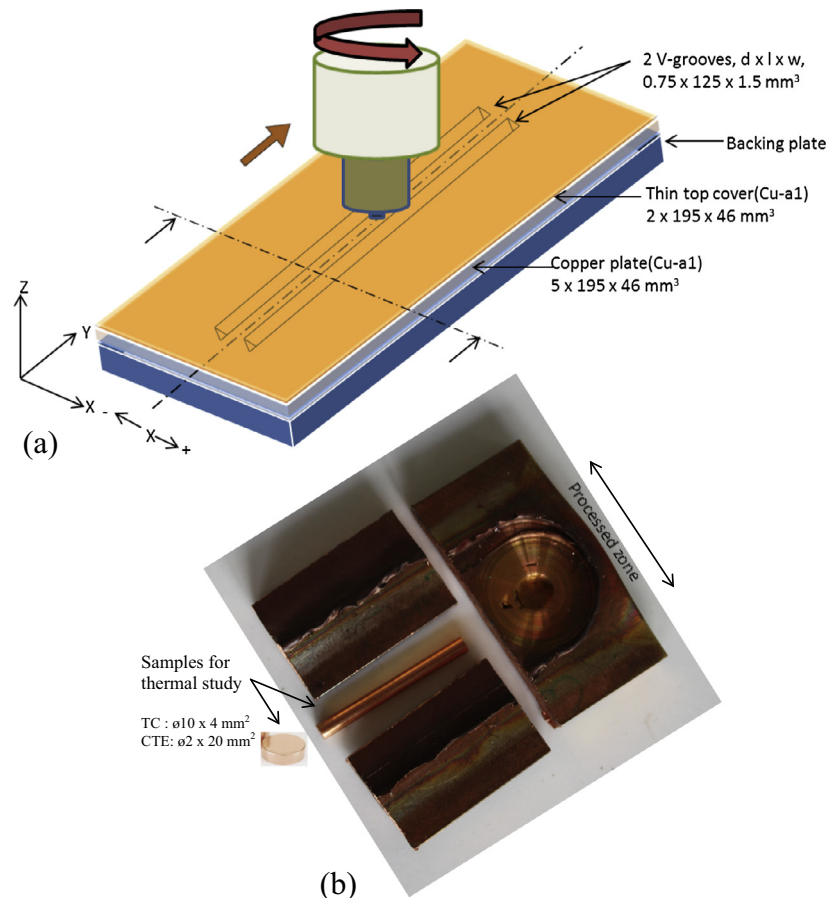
Schematic of the samples processed with the Friction Stir Processing tool. (a) General assembly and (b) location of the samples studied.
